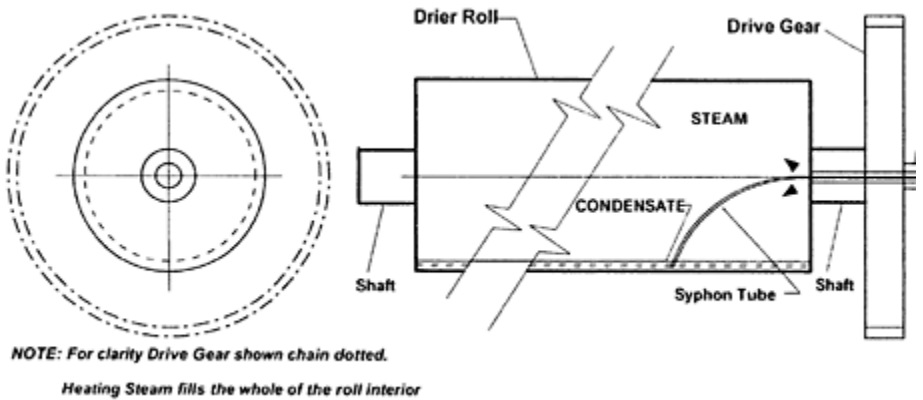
Schematic arrangement of steam heating of drier roll.
